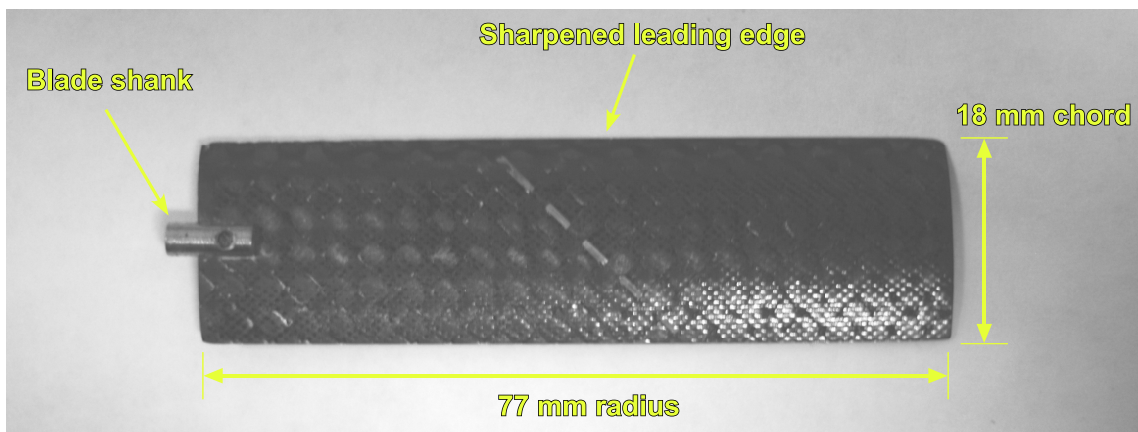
Photograph of the rotor blade and its principal dimensions.
